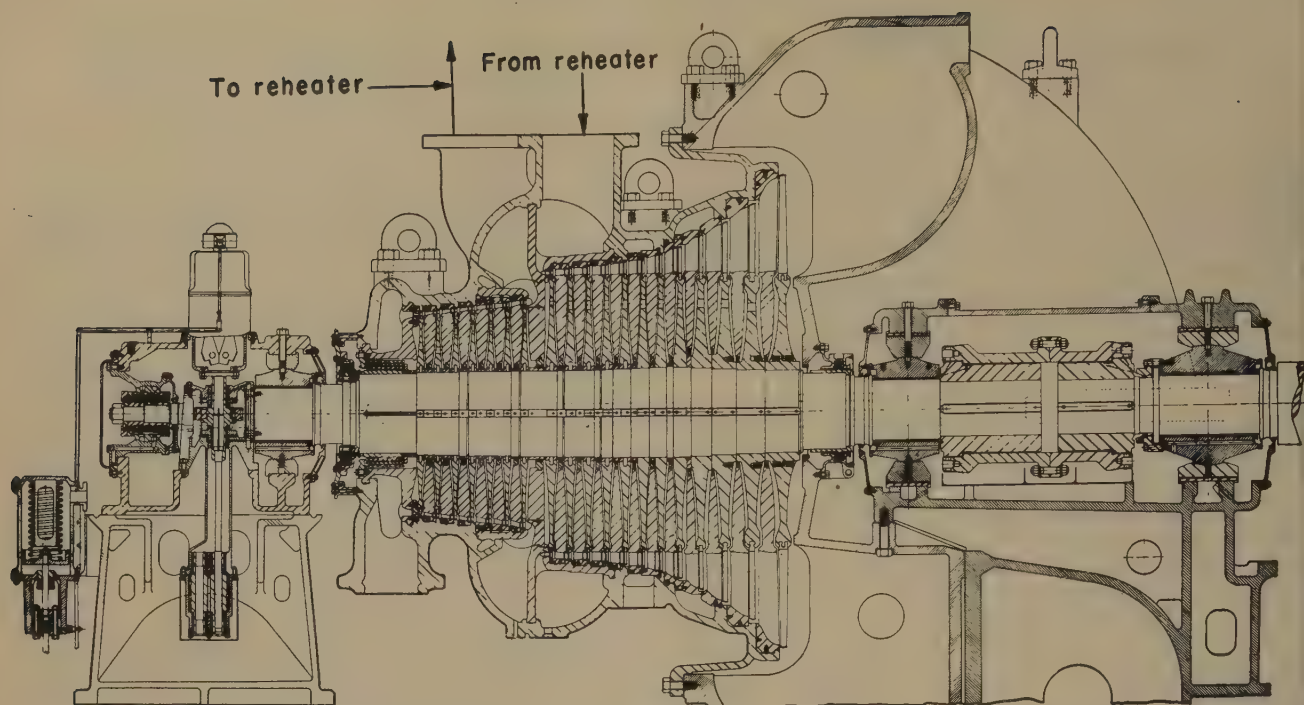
35,000-Kw 1800-RPM SINGLE-CYLINDER STEAM TURBINE OF EARLY DESIGN FOR RESUPERHEAT CYCLE
